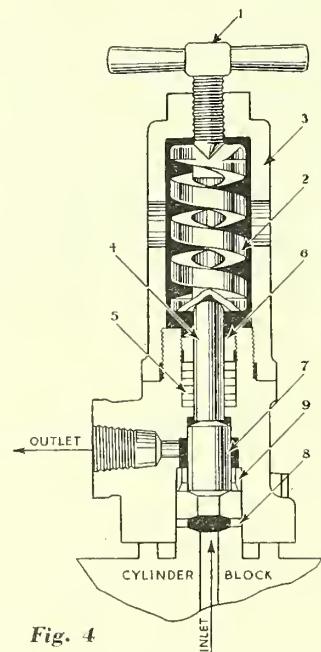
DUO-VISCO VALVE.—(1) Regulating screw; (2) Pressure spring; (3) Valve bonnet; (4) Valve stem; (5) Valve stem packing; (6) Packing gland; (7) Double-end viscolising valve; (8) "Blow-Proof" gasket; (9) Breaker ring and valve guide.
